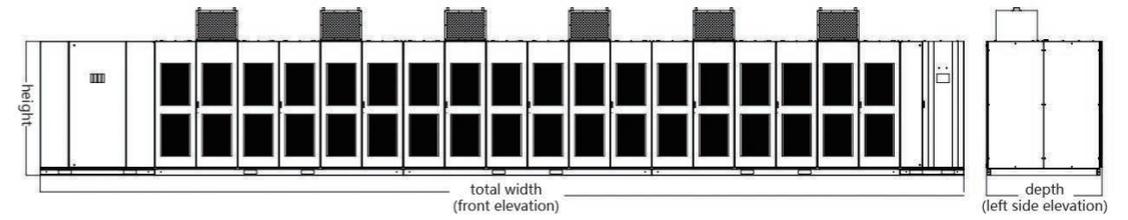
Dimensional Drawing of G31-35kV-Indoor-Air Cooling FGSVG-C12.0/35
